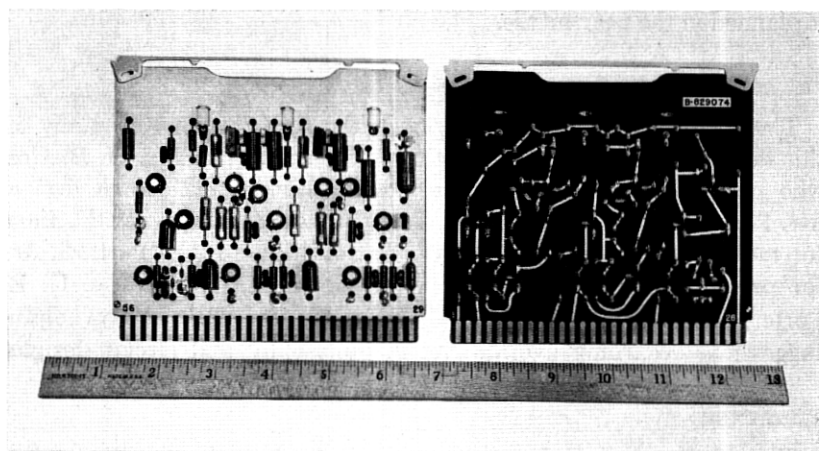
High speed plug-in card: (a) component side, (b) printed wiring side.
